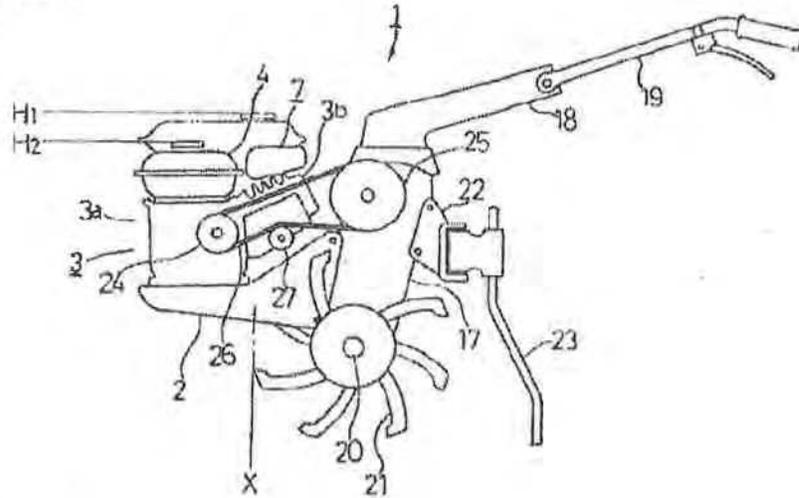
is a side view of a power cultivator according to the present invention; FIG. 2 is a sectional side view of line 2-2 in FIG. 3 showing a detail of an engine, auxiliary devices, and a fuel tank; FIG. 3 is a back side view of the positions shown in FIG. 2; and FIG. 4 is a schematic side view of a power cultivator according to conventional technology.
